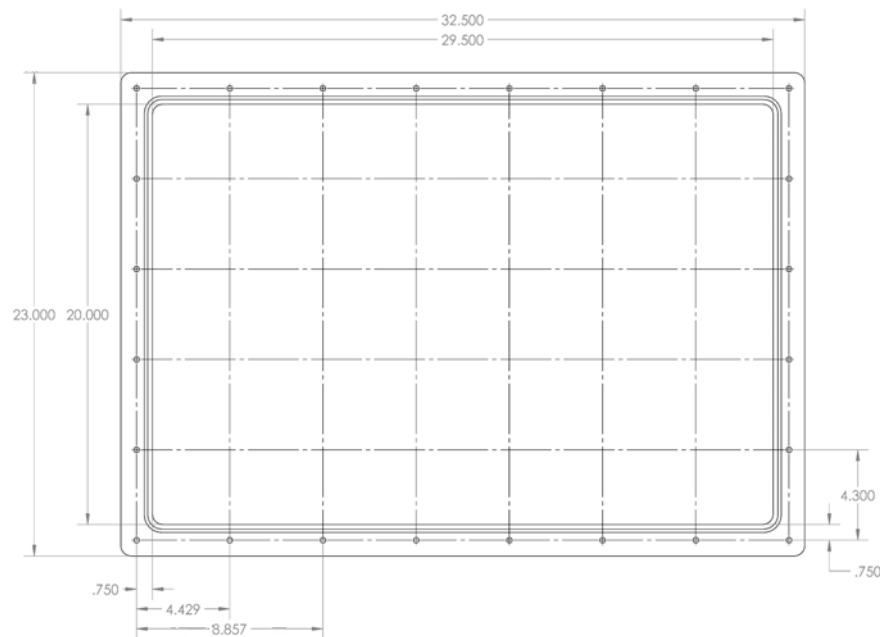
Test section door with mounting holes and flange. Inside dimensions are associated with the access hole located on the skeleton.
